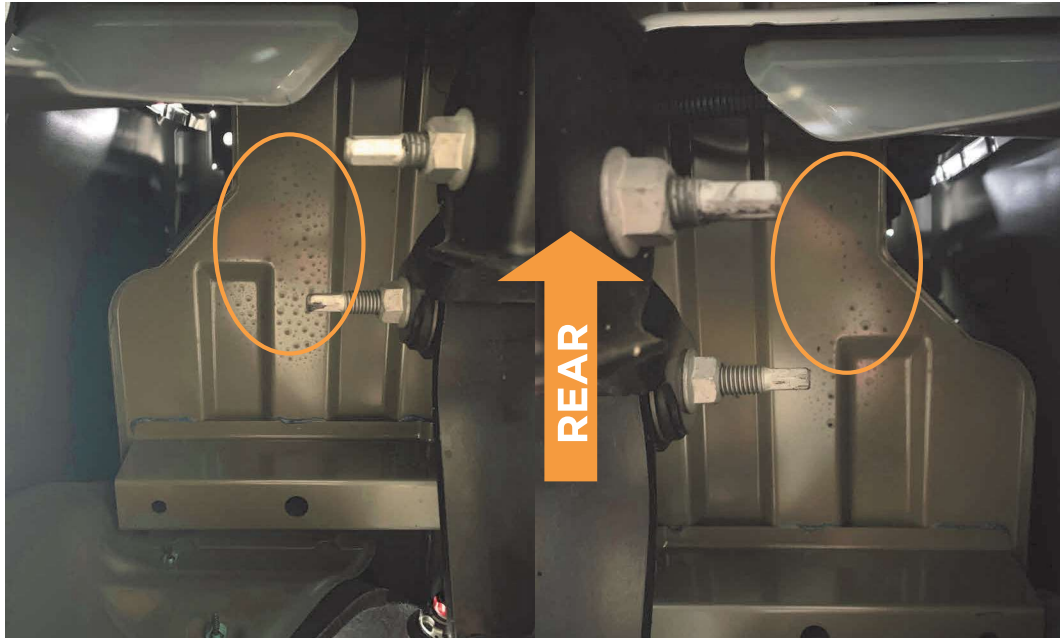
Circled rear bed lift points; (Left) driver side, (Right) passenger side (70-inch bed shown).
